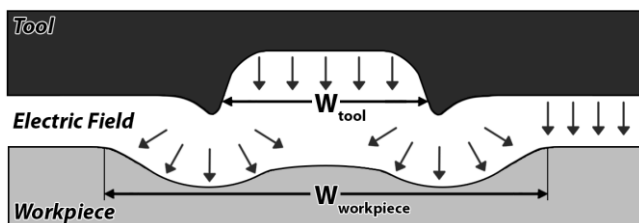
Schematic illustration of the electric removal mechanism between the tool and workpiece.
